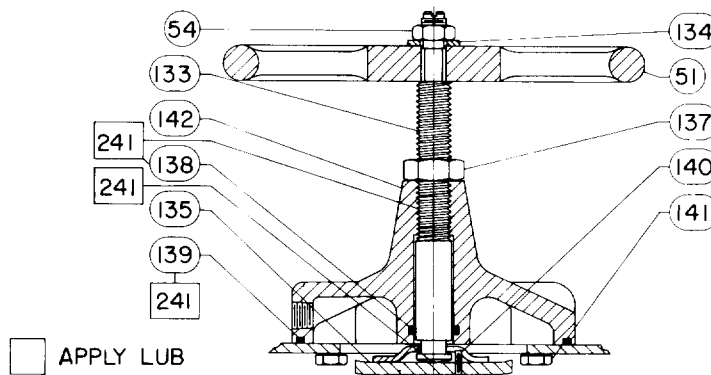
Top Mounted Handwheel Assembly for Size 30 Through 60 Actuators
